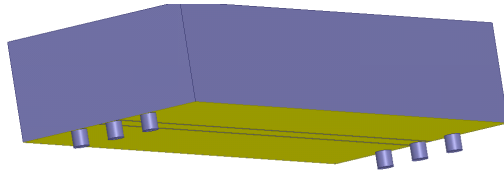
3D model of the flip-chip die with solder bumps.
